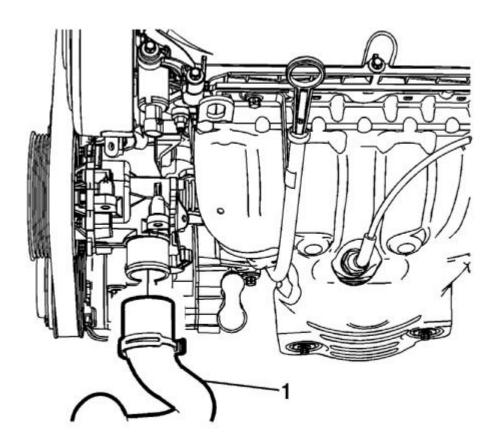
Radiator Outlet Hose Courtesy of GENERAL MOTORS COMPANY
